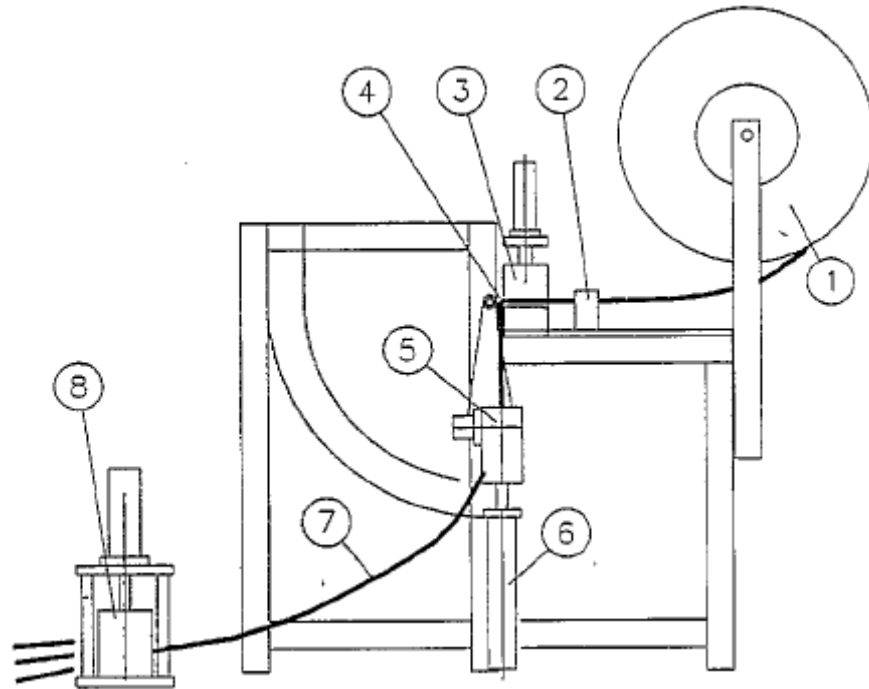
Strip drawing with bending (PtU) test [After Matthes et al., 1991]
